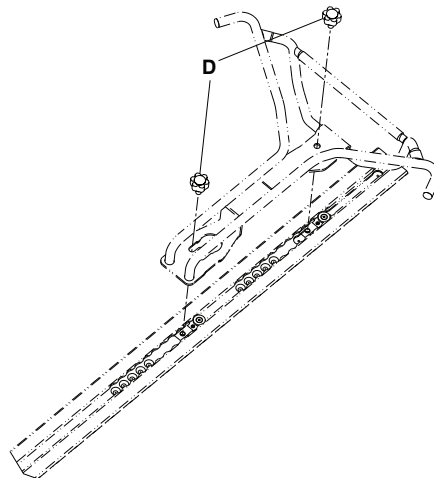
Antler assembly with silver knobs (6390-001-033)
